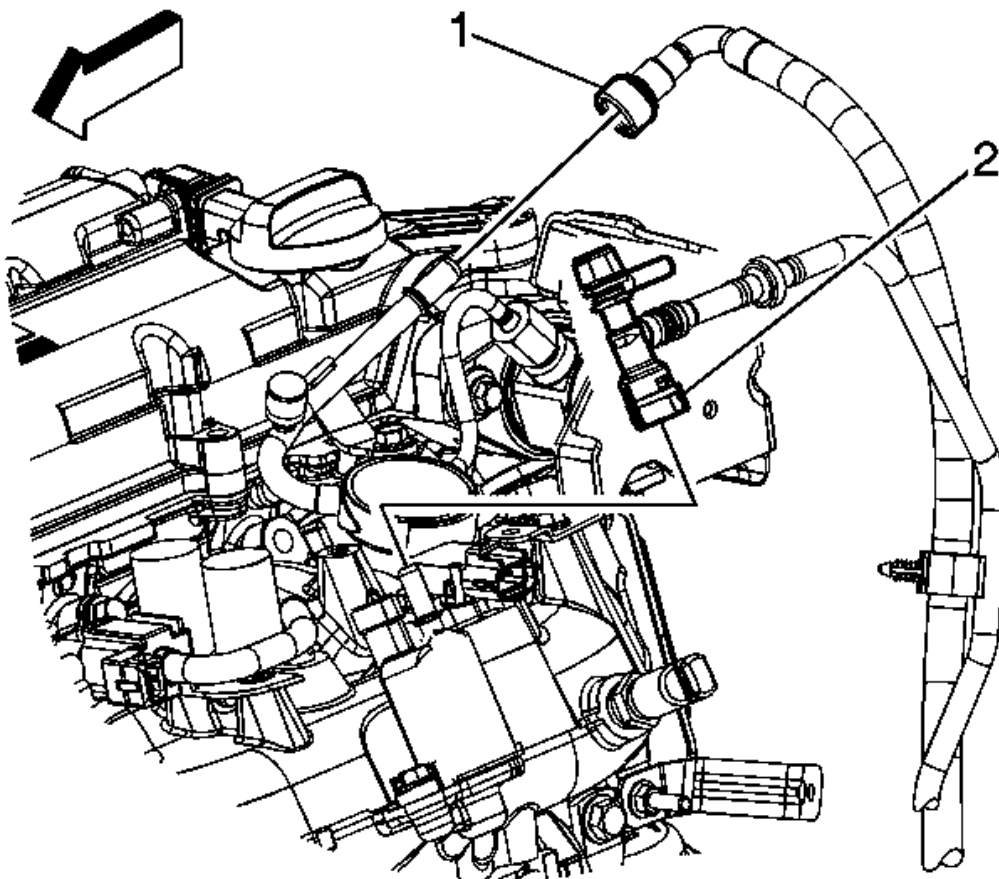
Identifying EVAP & Fuel Feed Pipes
